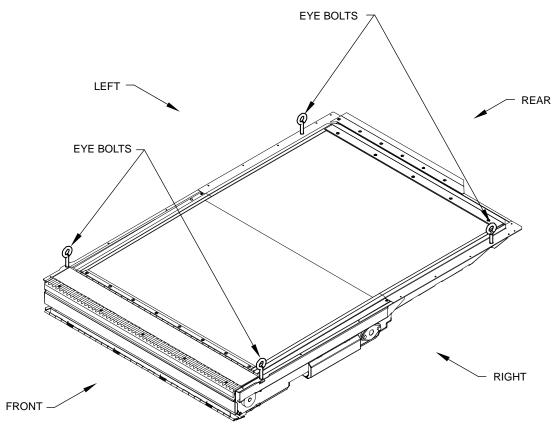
RAMP LIFTING EYE BOLTS
